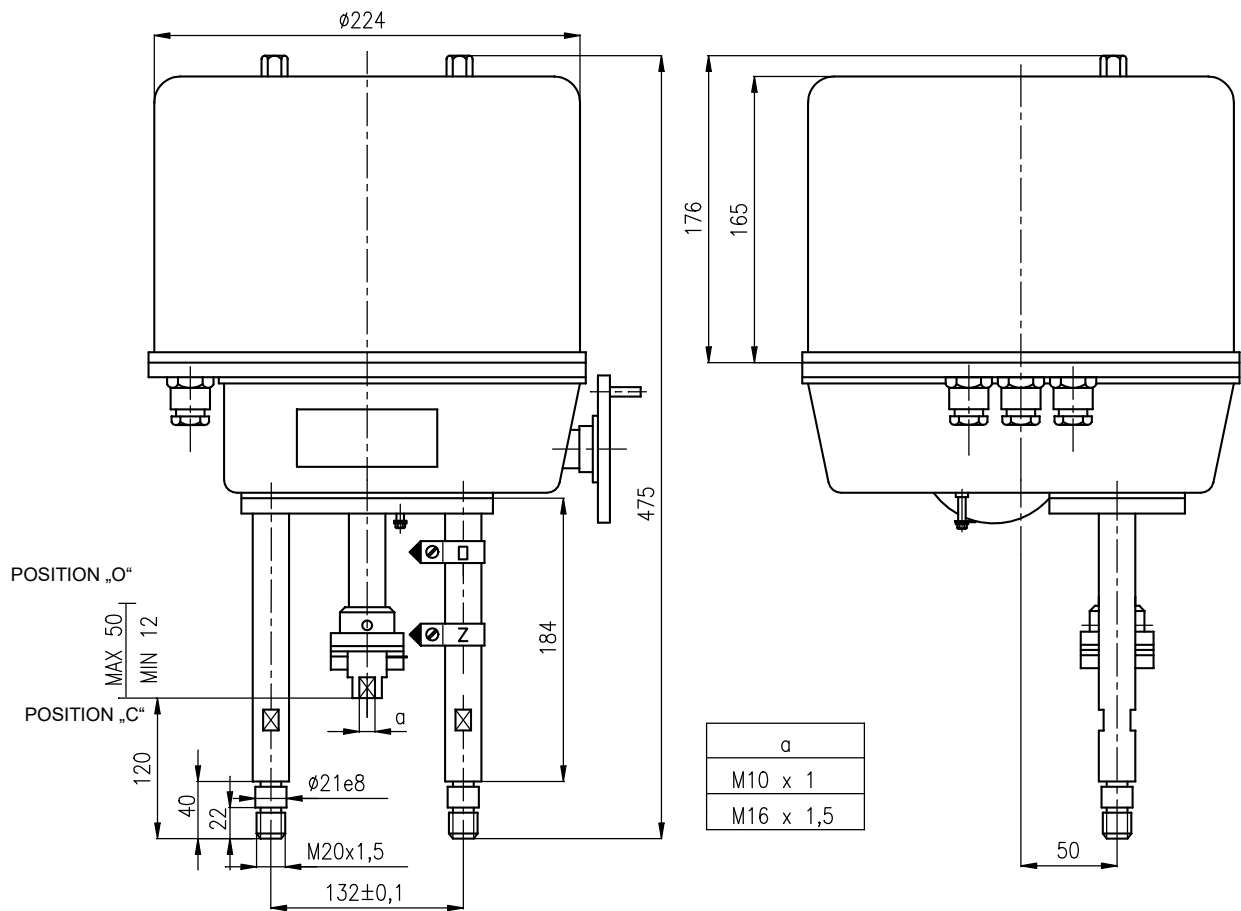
DIMENSIONAL DRAWING - CONNECTION P4
